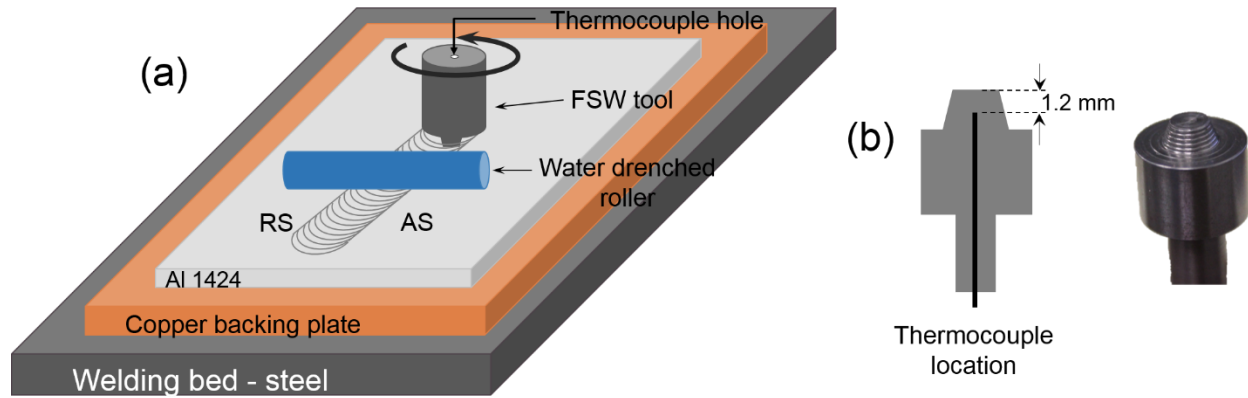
(a) Schematic of the welding setup used in weld 2, and (b) schematic showing thermocouple location for temperature measurement and image of actual tool used.
